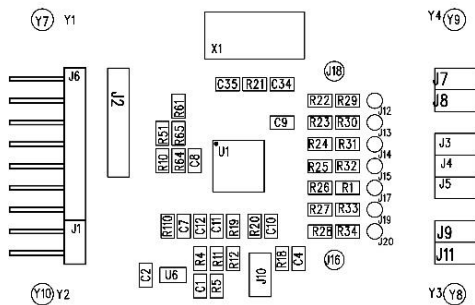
AS6500-QF_DK_RB layout, version 1.1
